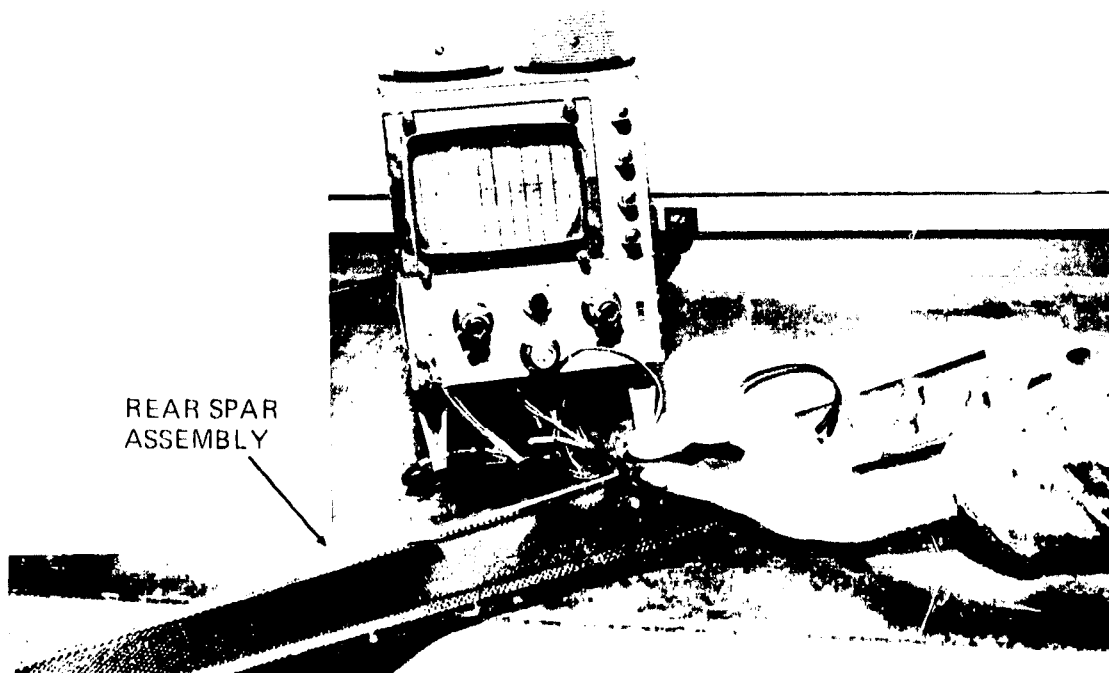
Sondicator Inspection of Rear-Spar Assembly
